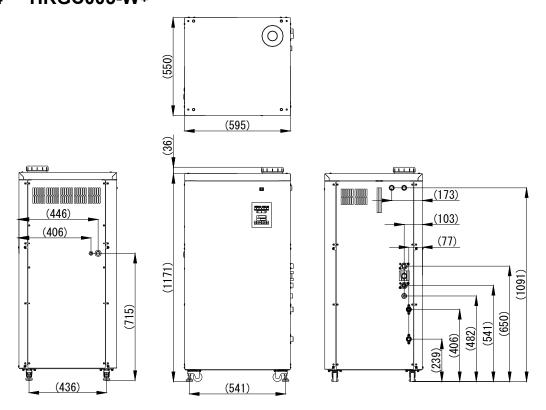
Outline Dimensions (fig.HRGC005-W)
